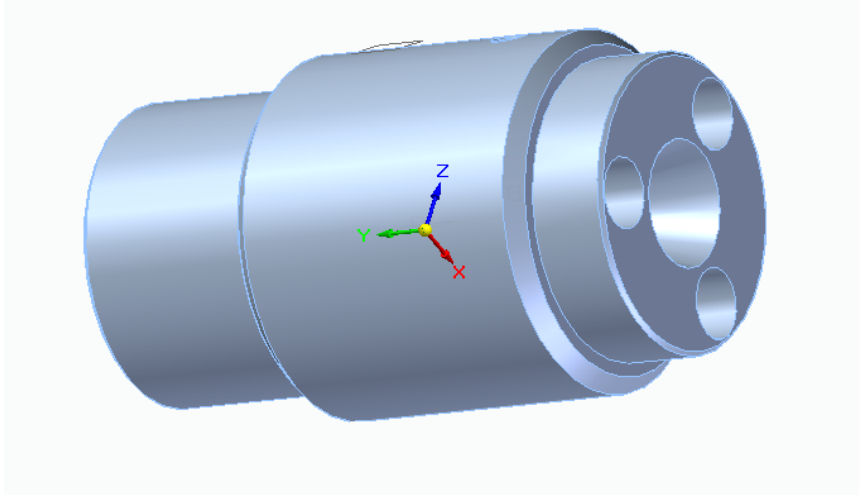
bushing technical drawing, source: schnell spa purchasing office
